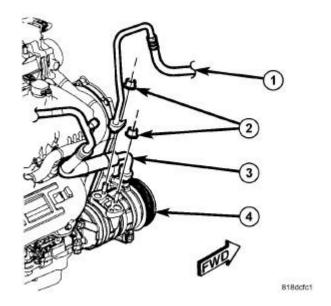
A/C Lines To Compressor Courtesy of CHRYSLER LLC
